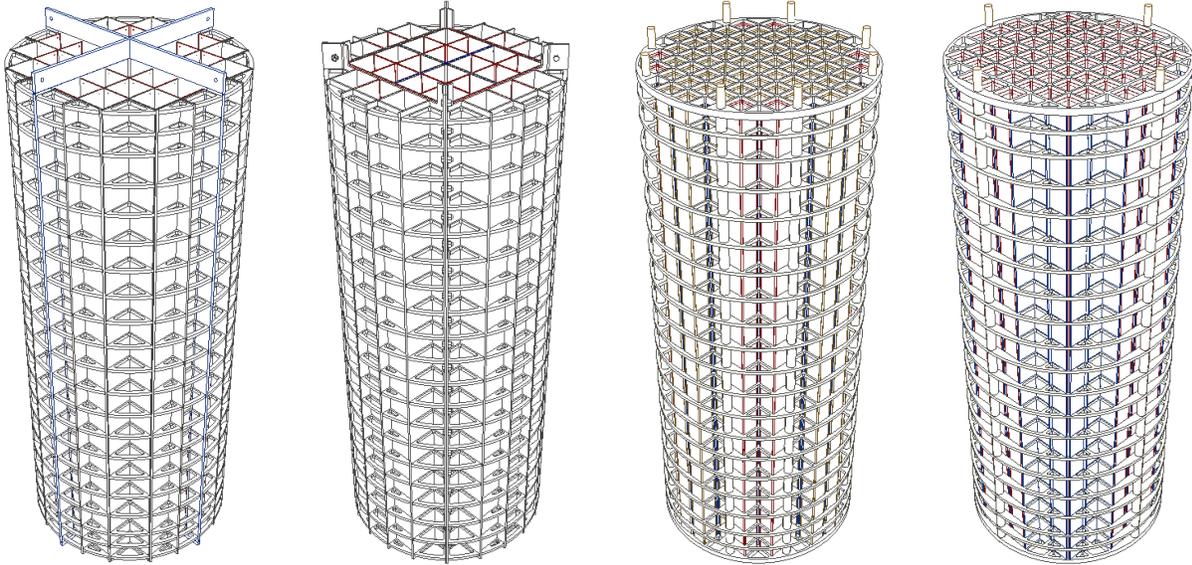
Perspective Views (from left to right) for 32-PWR, 28-PWR, 68-BWR and 61-BWR Fuel Assembly Baskets
